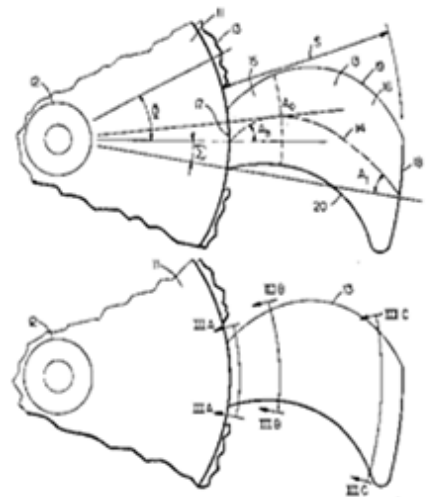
Front elevation views showing a portion of the hub and one blade of one embodiment.
